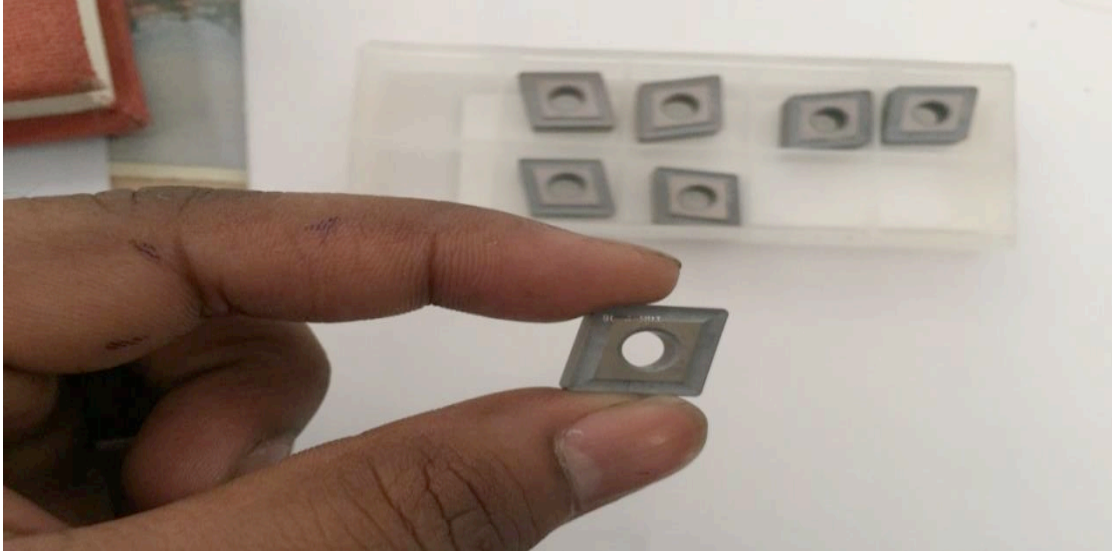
Carbide tool materials (CNMG 120408-THM-F)
